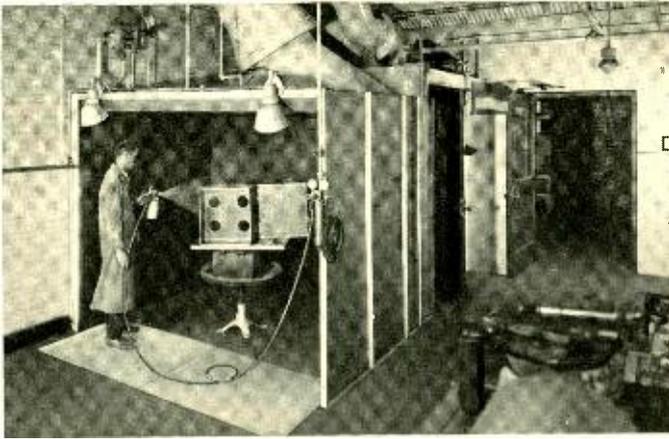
The lacquer and japan finishing rooms are located in section 3-E
